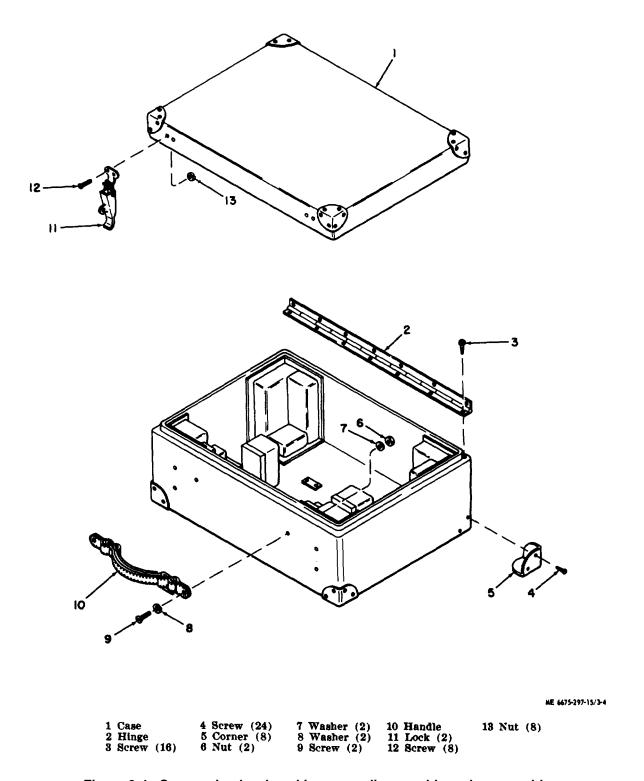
Suspension level packing case, disassembly and reassembly.
